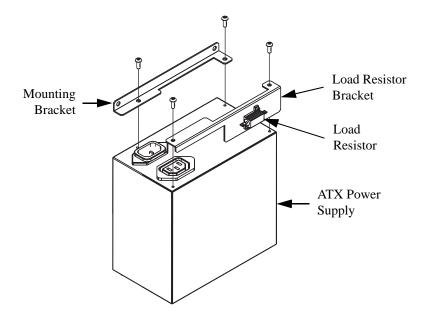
Removing the Load Resistor and Mounting Brackets from the ATX Power Supply
